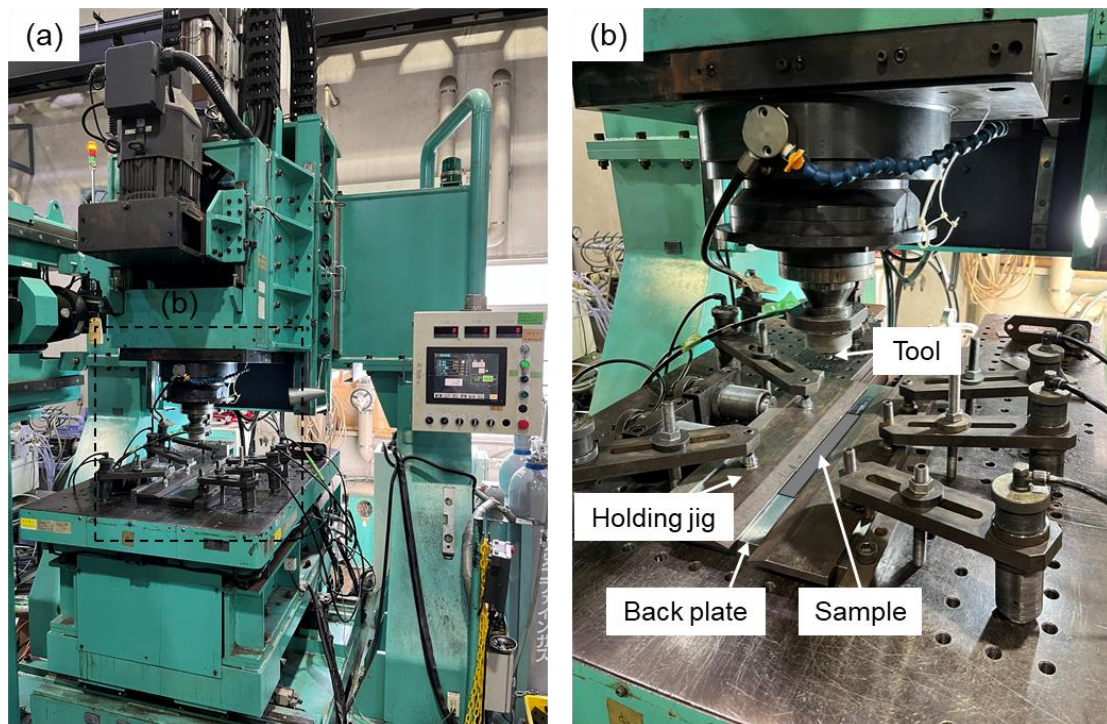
Photograph of (a) the entire friction stir welding equipment and (b) the working part used in this study.
